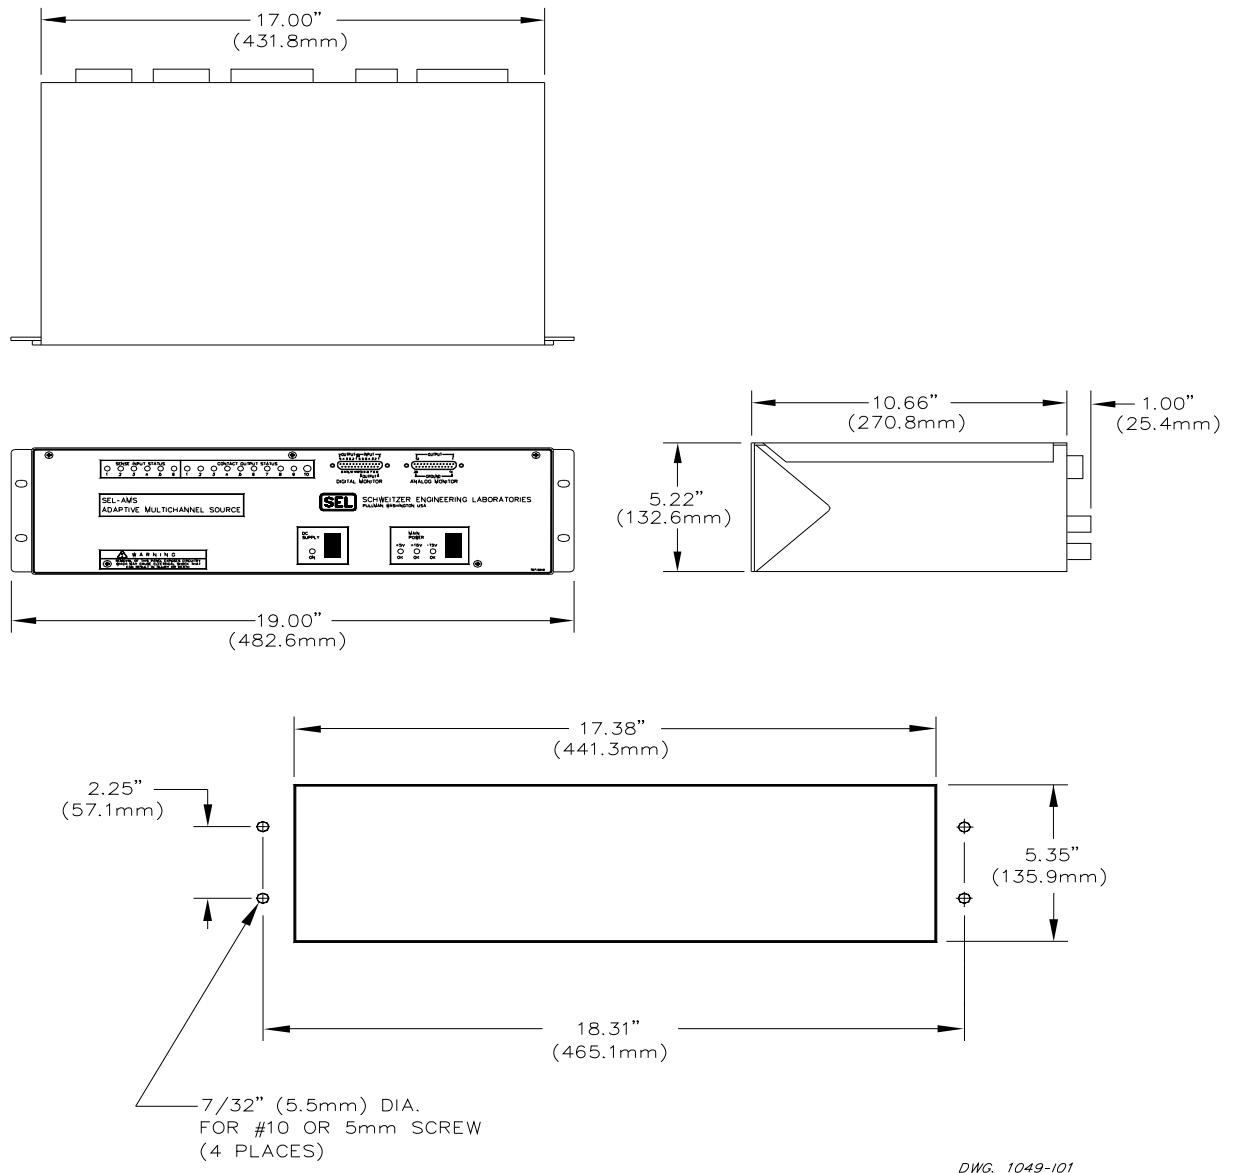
SEL-AMS Dimensions, Panel Cutout, and Drill Plan
